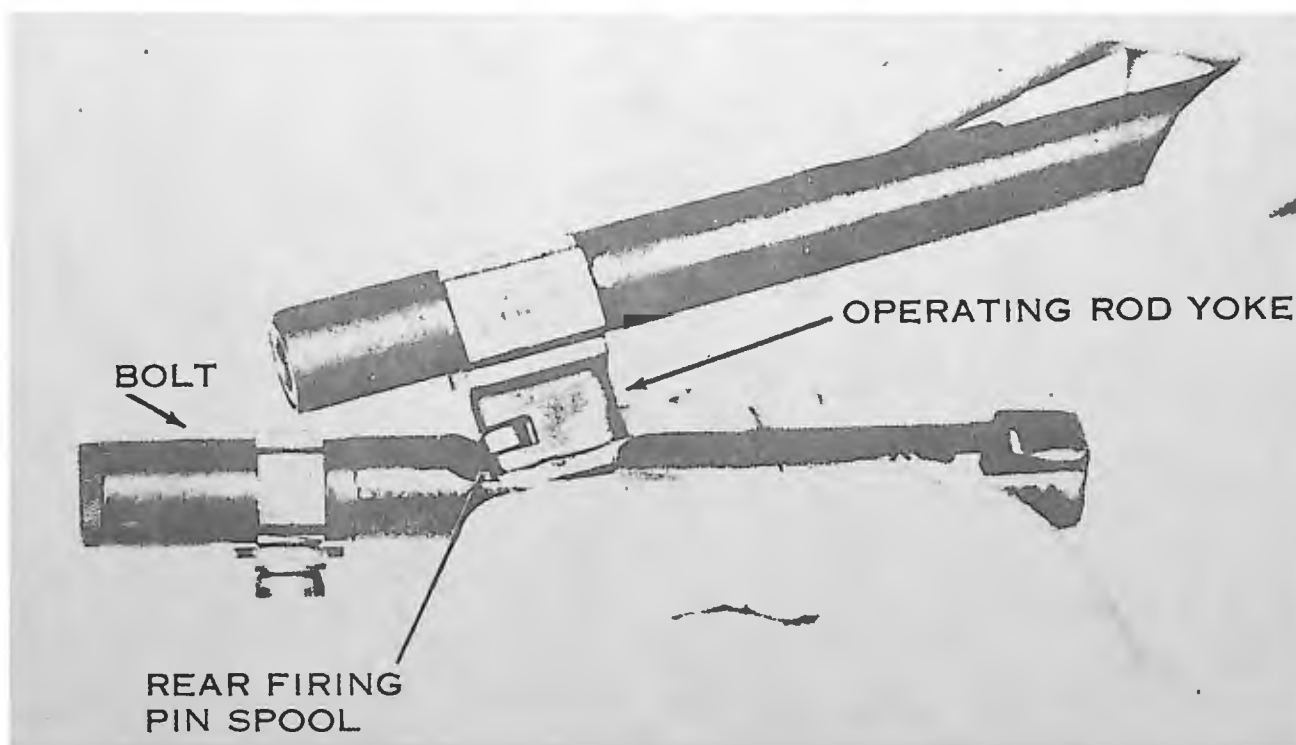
ASSEMBLY OF THE BOLT TO THE OPERATING ROD
